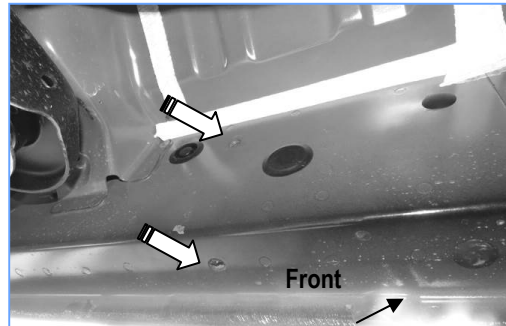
Driver Side Rocker Panel Mounting Locations Illustrated (Arrows) NOTE: Hold Bracket Up To Body Panel To Help Determine The Correct Mounting Locations.
